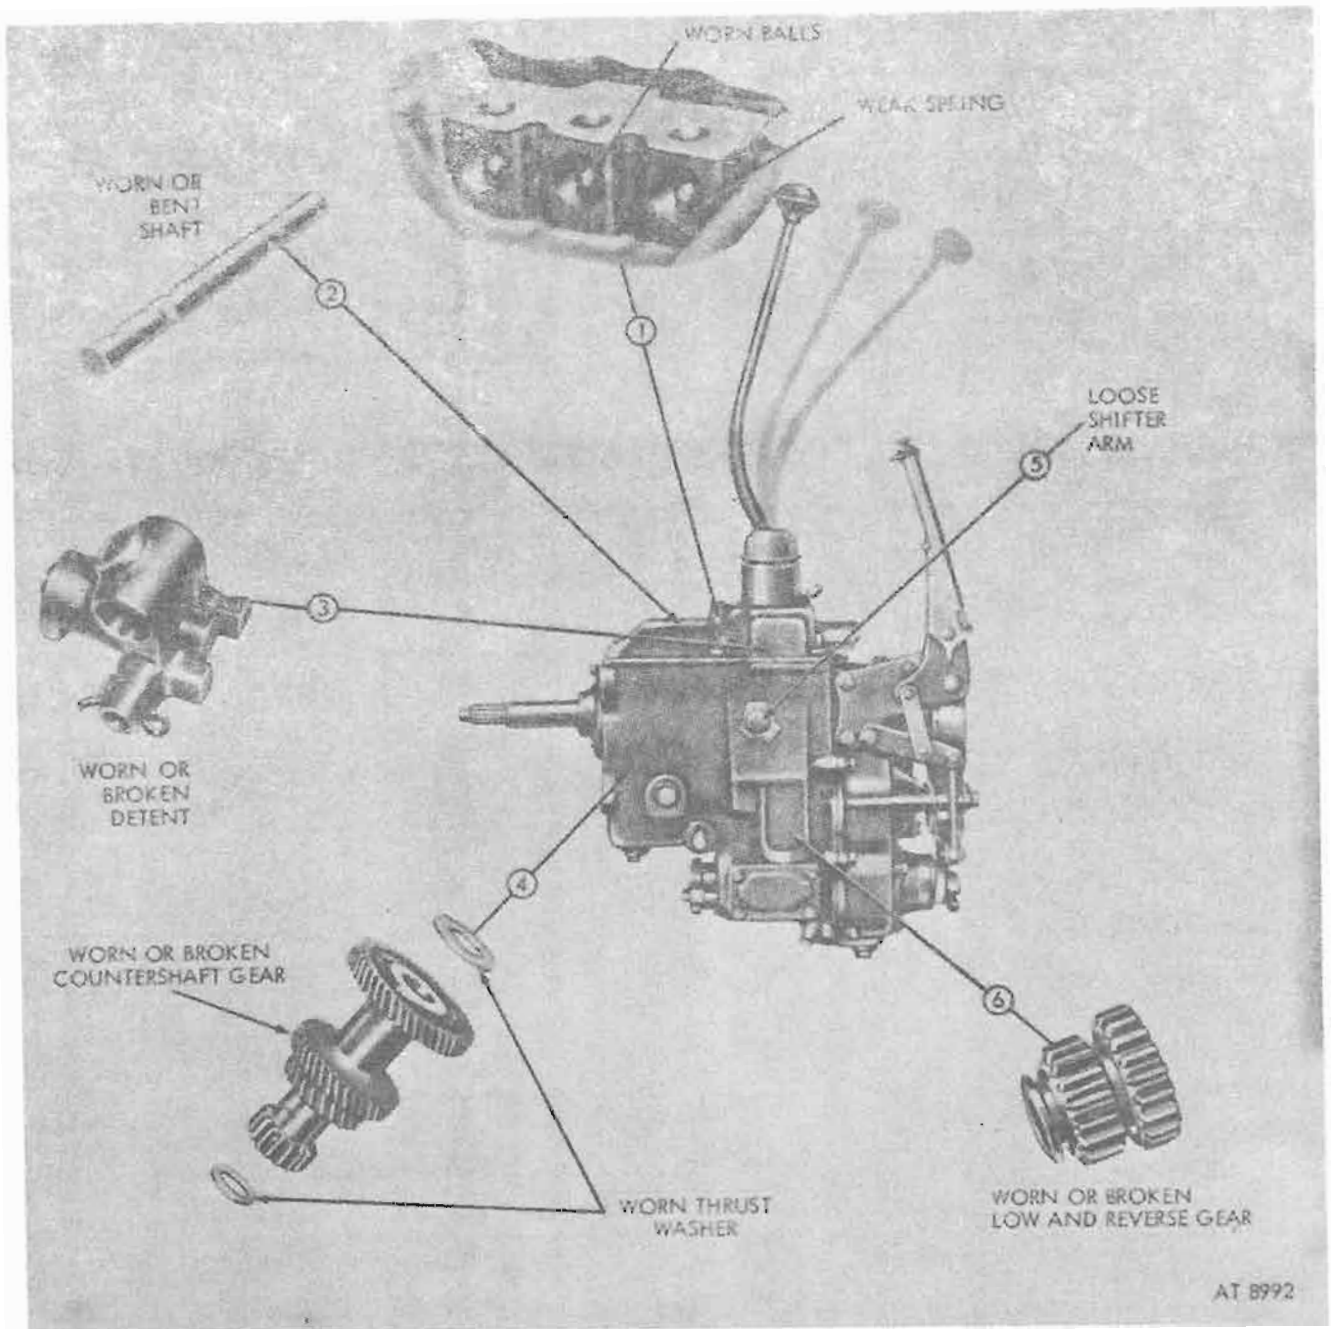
Gearshift lever slips out of first or reverse gear.
